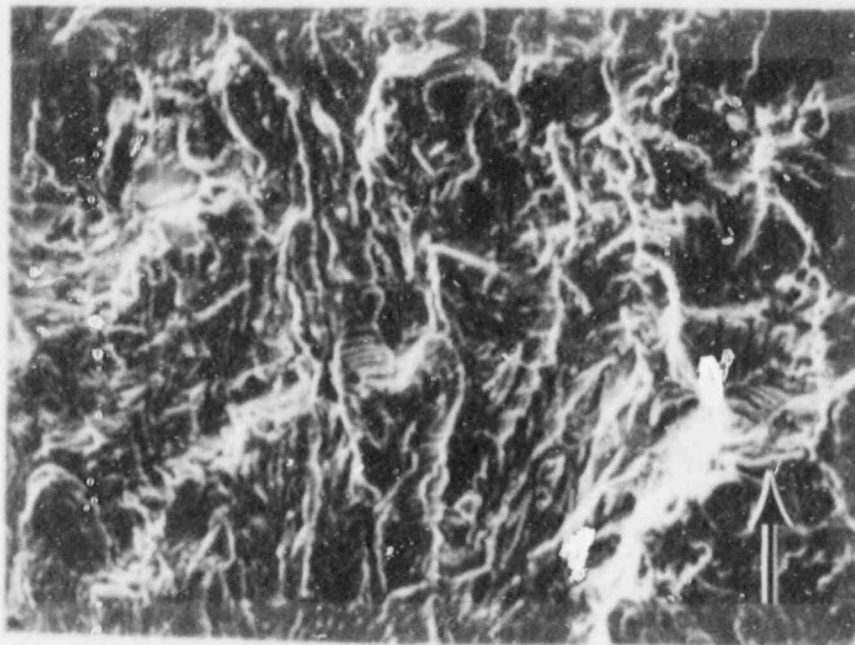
Fractograph of base metal smooth specimen ZP11-10, which failed after 824,190 cycles tested in 24°C air. The arrow shows the direction of crack growth. 700x.
